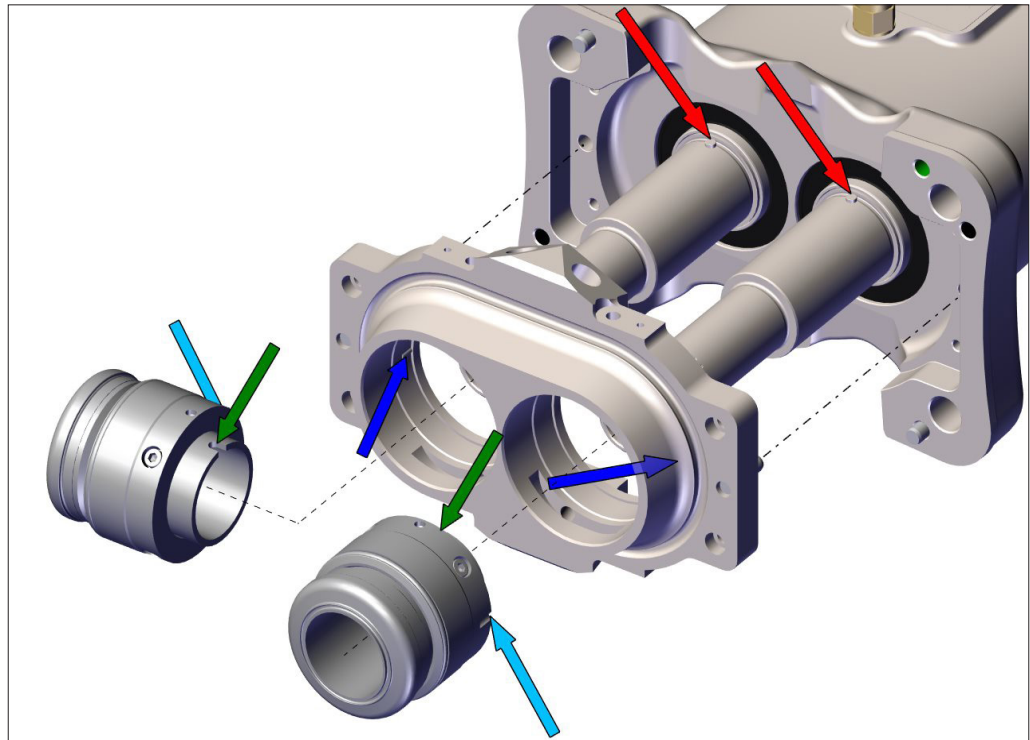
Positioning slot (light blue), positioning pin (dark blue), driver slot (green) and driver pin (red)
